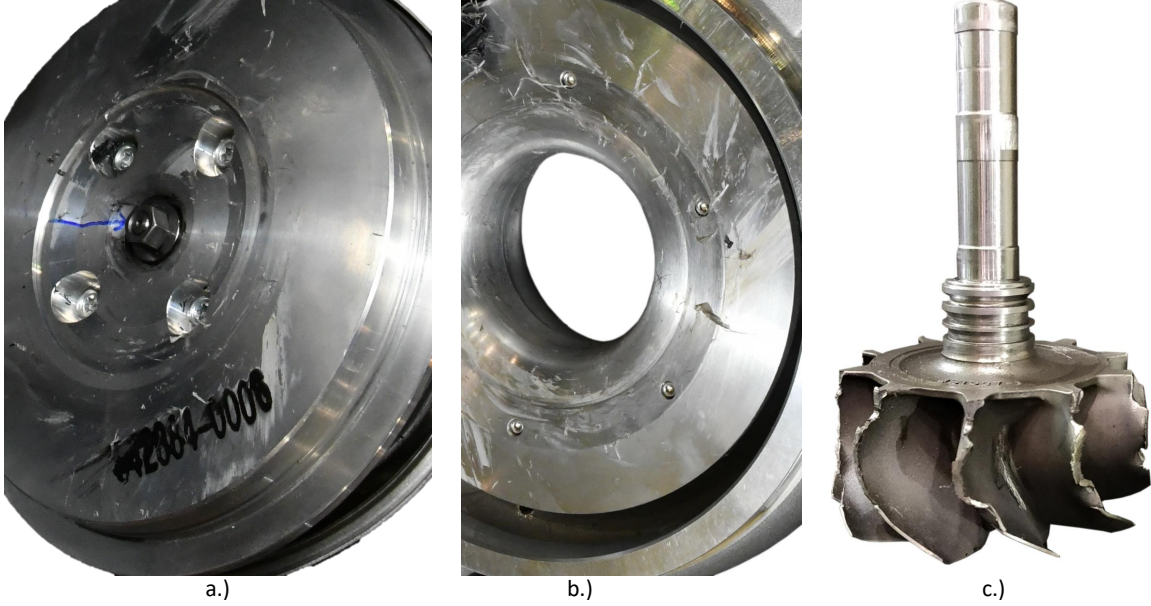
Housing and Turbine from P400 Compressor, ULTEM 9085 Test. a.) Compressor Back Plate. b.) Compressor Shroud. c.) Turbine.
